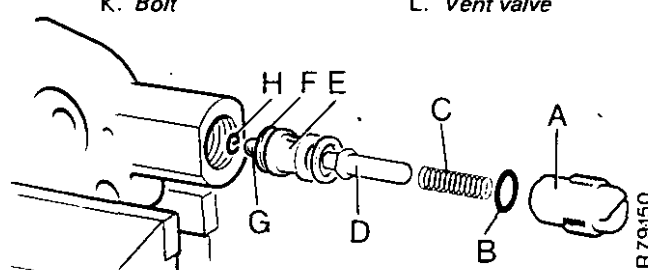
DISASSEMBLY OF THE VENT VALVE
